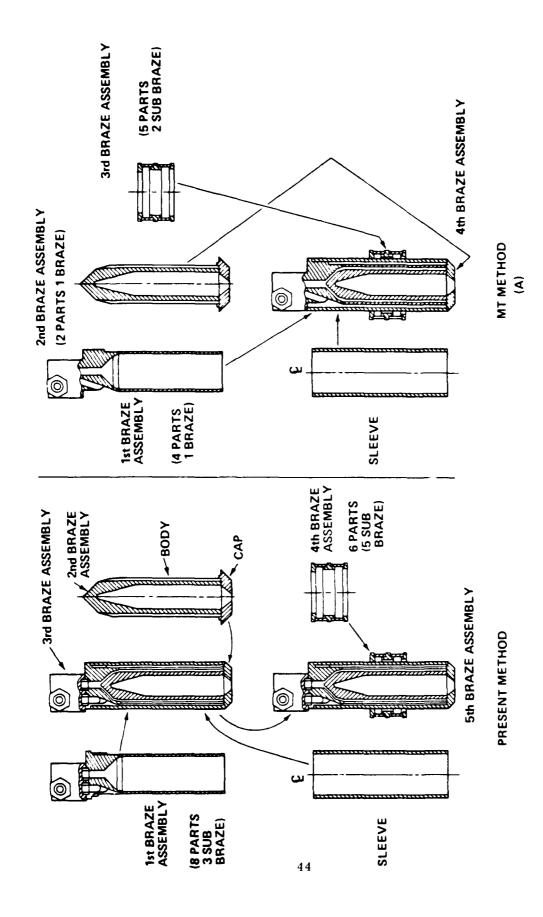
FINAL COLLECTOR ASSEMBLY
